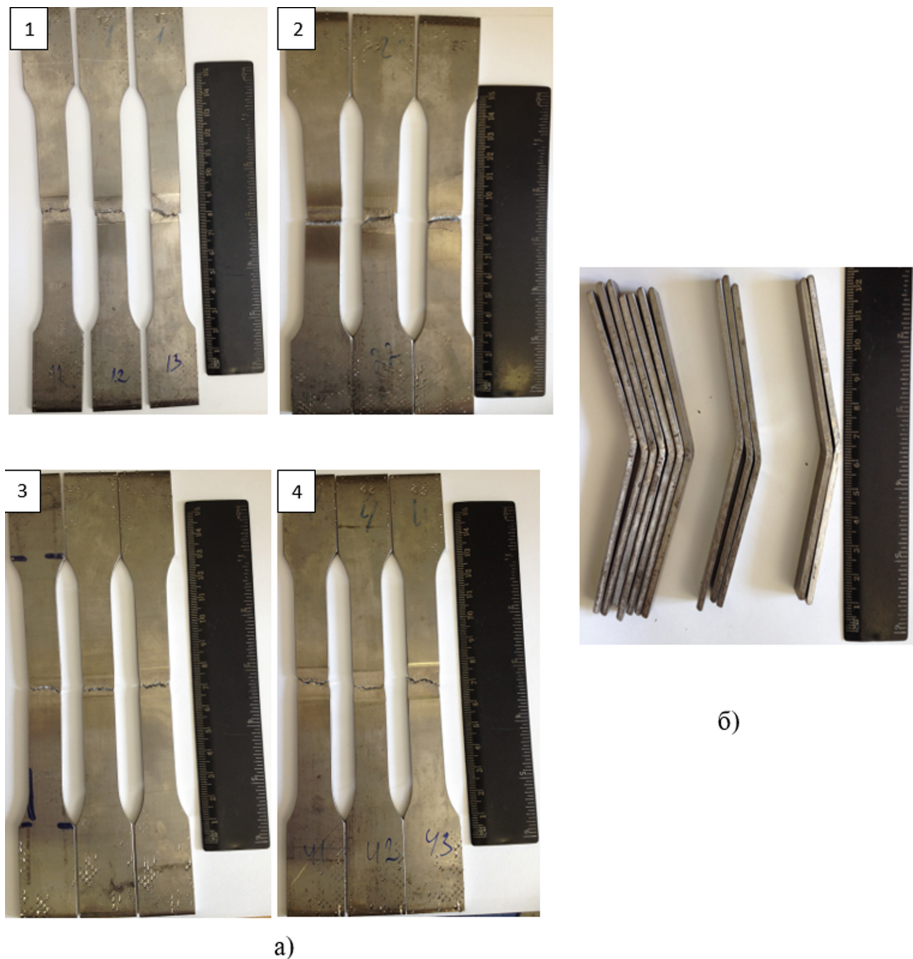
Fracture type for automatic GTAW welding coupons after tensile strength tests (a, 1 to 4) and bend tests (b) *Source:* Images made by the authors
